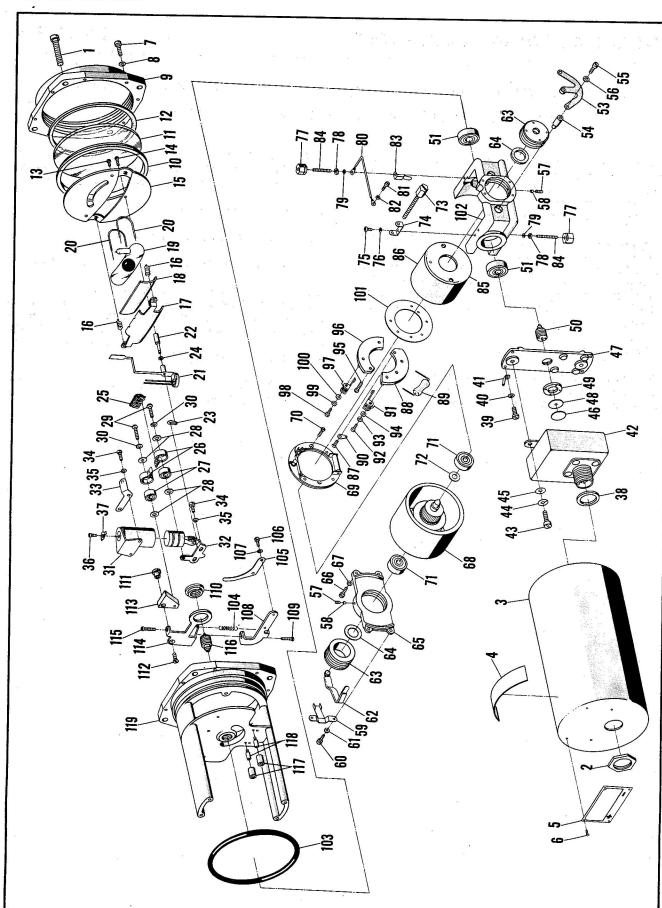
Bank and Turn Indicator Assembly, Model B4A
